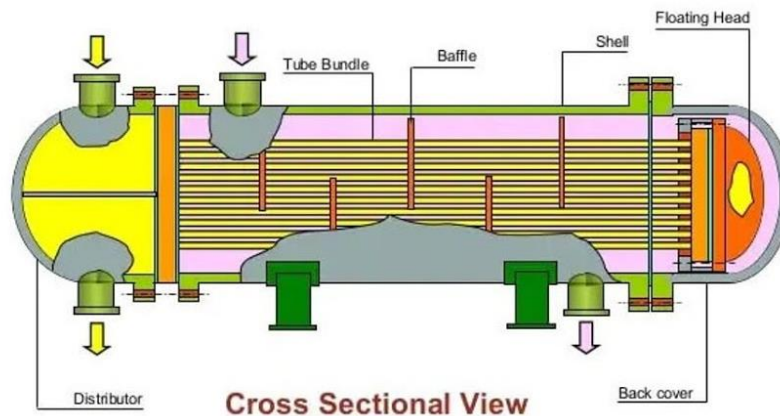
Floating Head shell and tube heat exchanger(Arani and Moradi, 2019).
